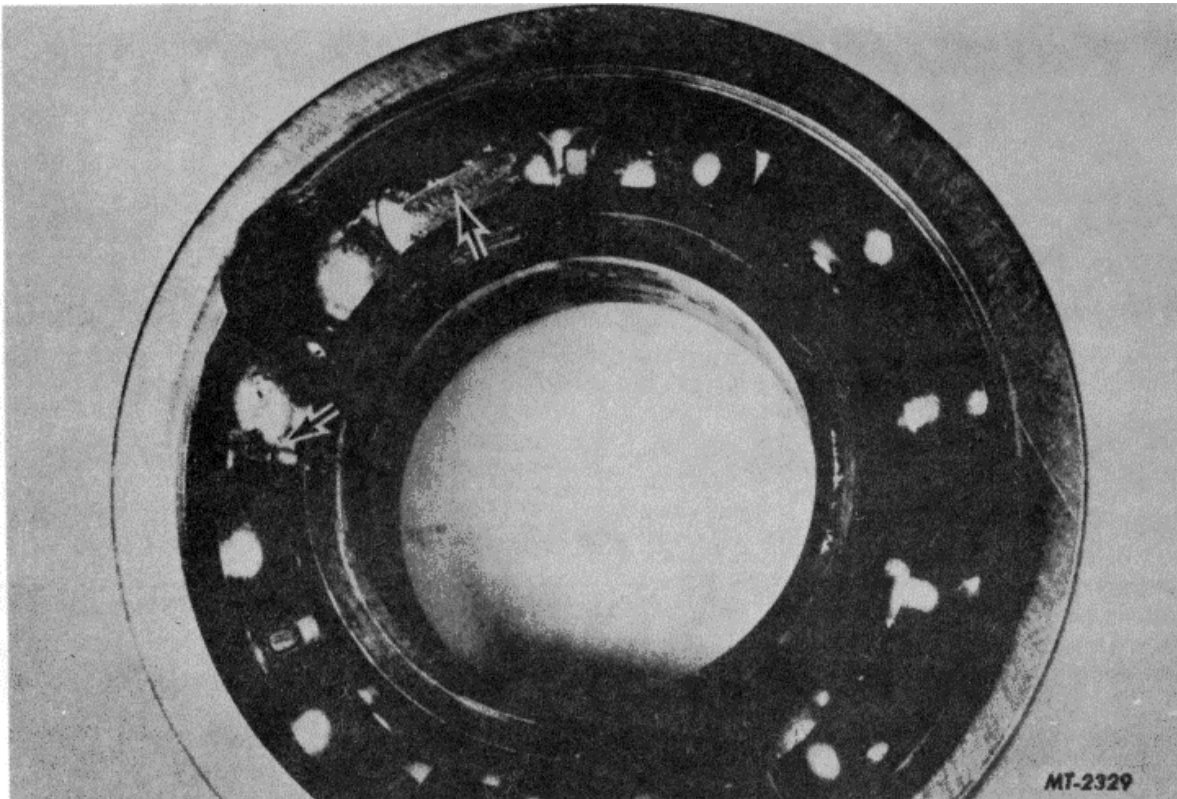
Failure of Ball Separator As Result of Misalignment
